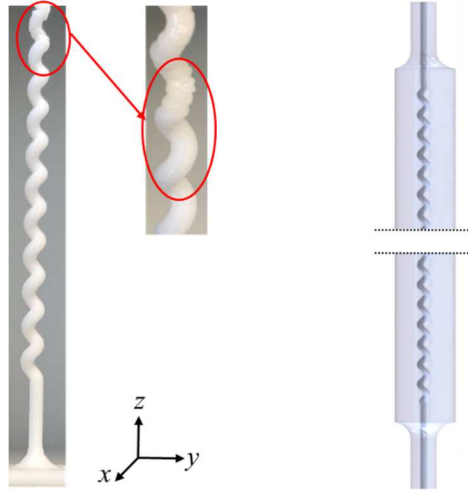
3D-printed helical tubes: (a) Photo of the failed model, (b) CAD design of the successful model.
